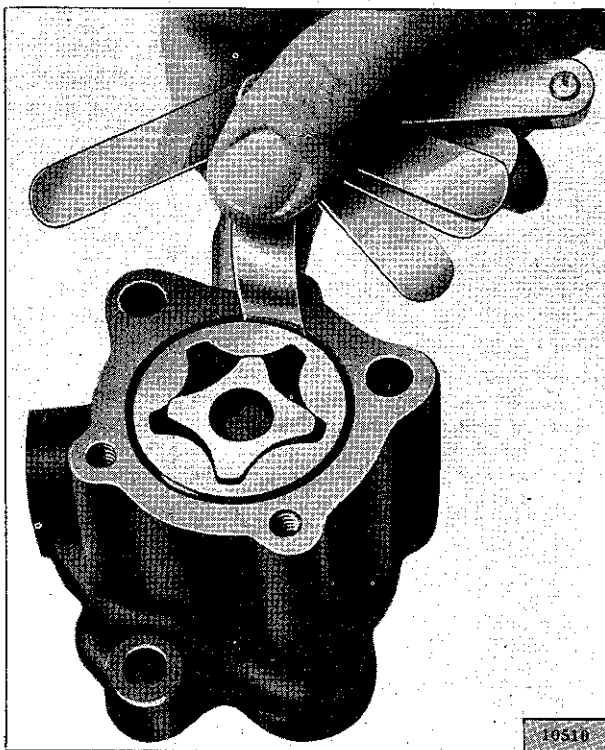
CHECKING OUTER ROTOR TO OIL PUMP BODY
